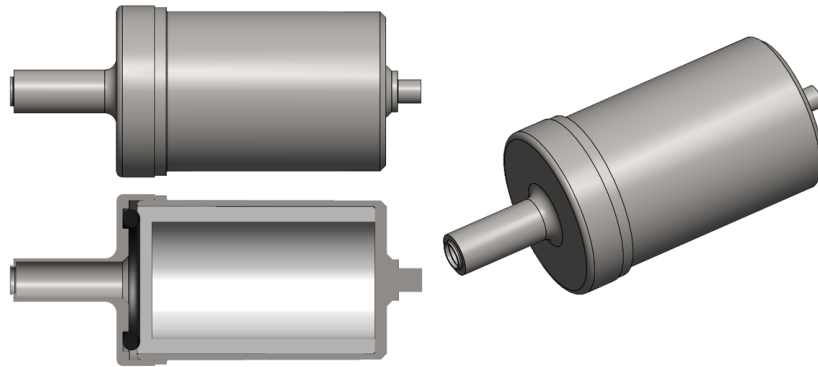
Side View, Isometric View and Cross-sectional View of the Accumulator Housing.
